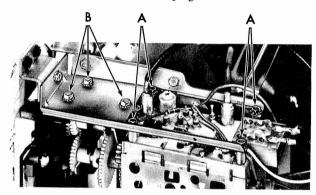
View Of VHF Tuner Shown Mounted On Chassis.
